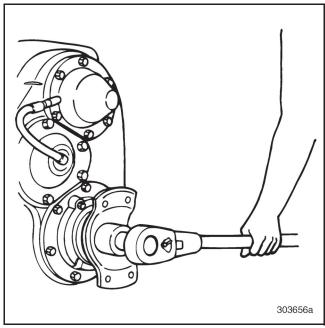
Removing Rear-Drive Shaft Clamp Plate Capscrew
